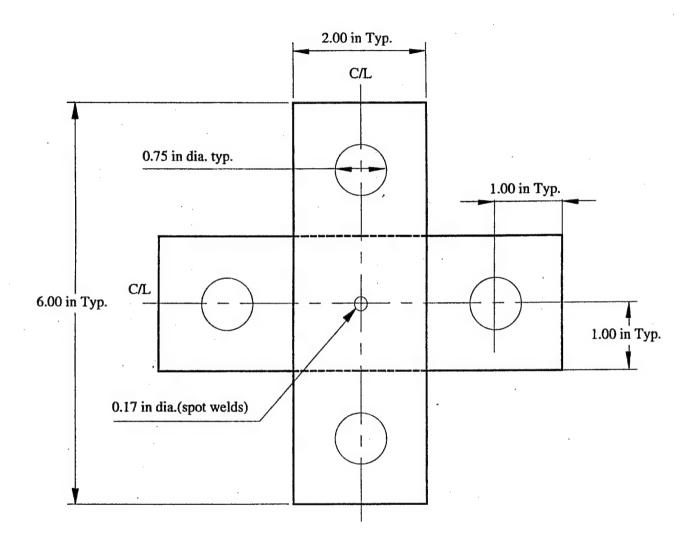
Spot Weld Tensile Specimen Layout and Dimensions
